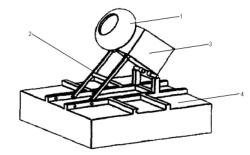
The overall structure of seed coating machine 1- Coating pot; 2- Inclination adjusting device; 3- Rotary motor; 4- Vibrating table
